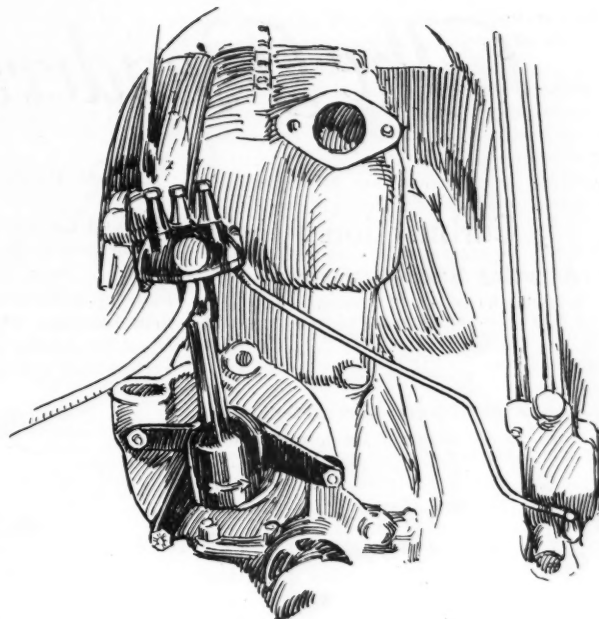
Type H Atwater Kent Unisparker bolted in place on Ford engine
